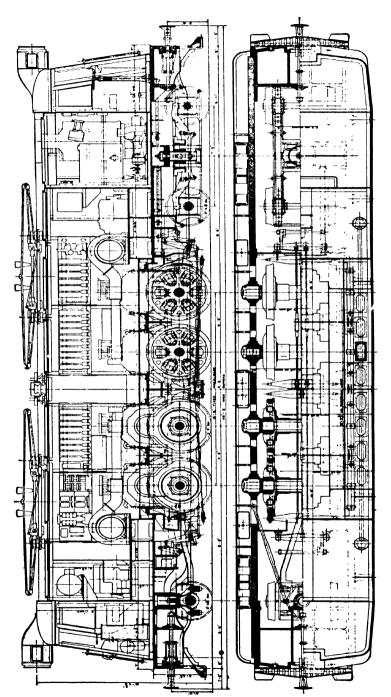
Plan and elevation of mixed-traffic locomotive. (New Zealand Government Railways.)
